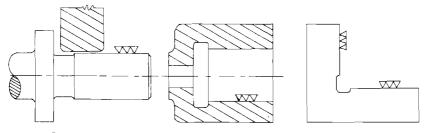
Some design details which can be introduced to give run-out space for grinding wheels.
